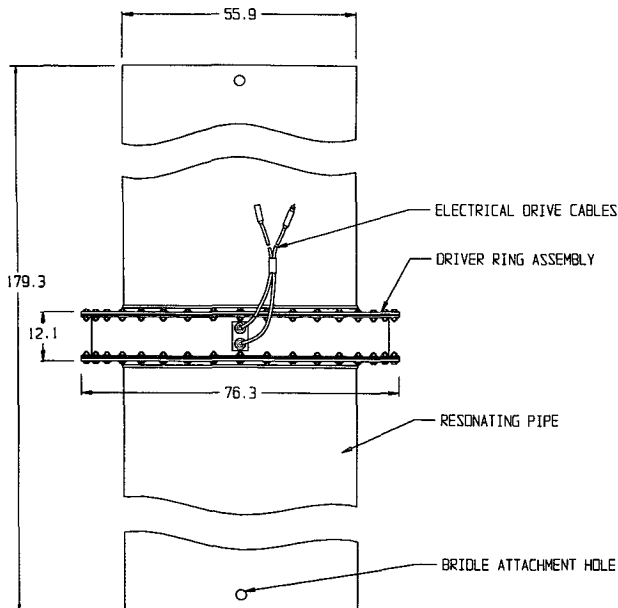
Schematic drawing of the resonant pipe projector. The piezoelectric driver ring is prestressed into compression against the midsection of the pipe. It is encapsulated in a three-piece rubber boot assembly that is clamped together by the two sets of bolts. The pipe dimensions are 1.793 m long, 0.559 m diameter, and with a 0.64-cm wall thickness. It weighs 241 kg in air and 198 kg in water.
